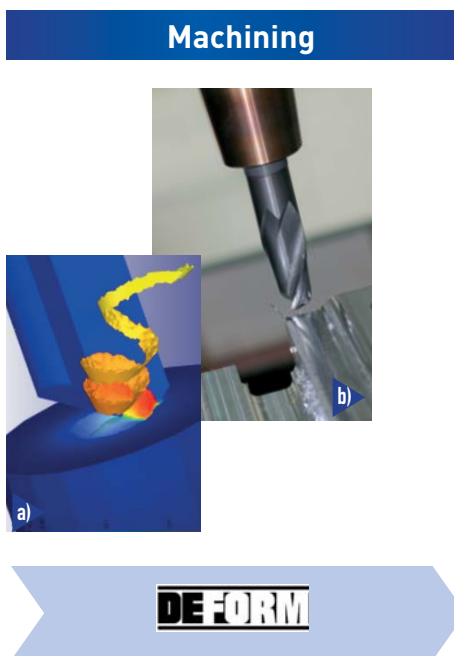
a) Simulation of heat development and residual stresses during mechanical machining; b) Mechanical machining of step plate
